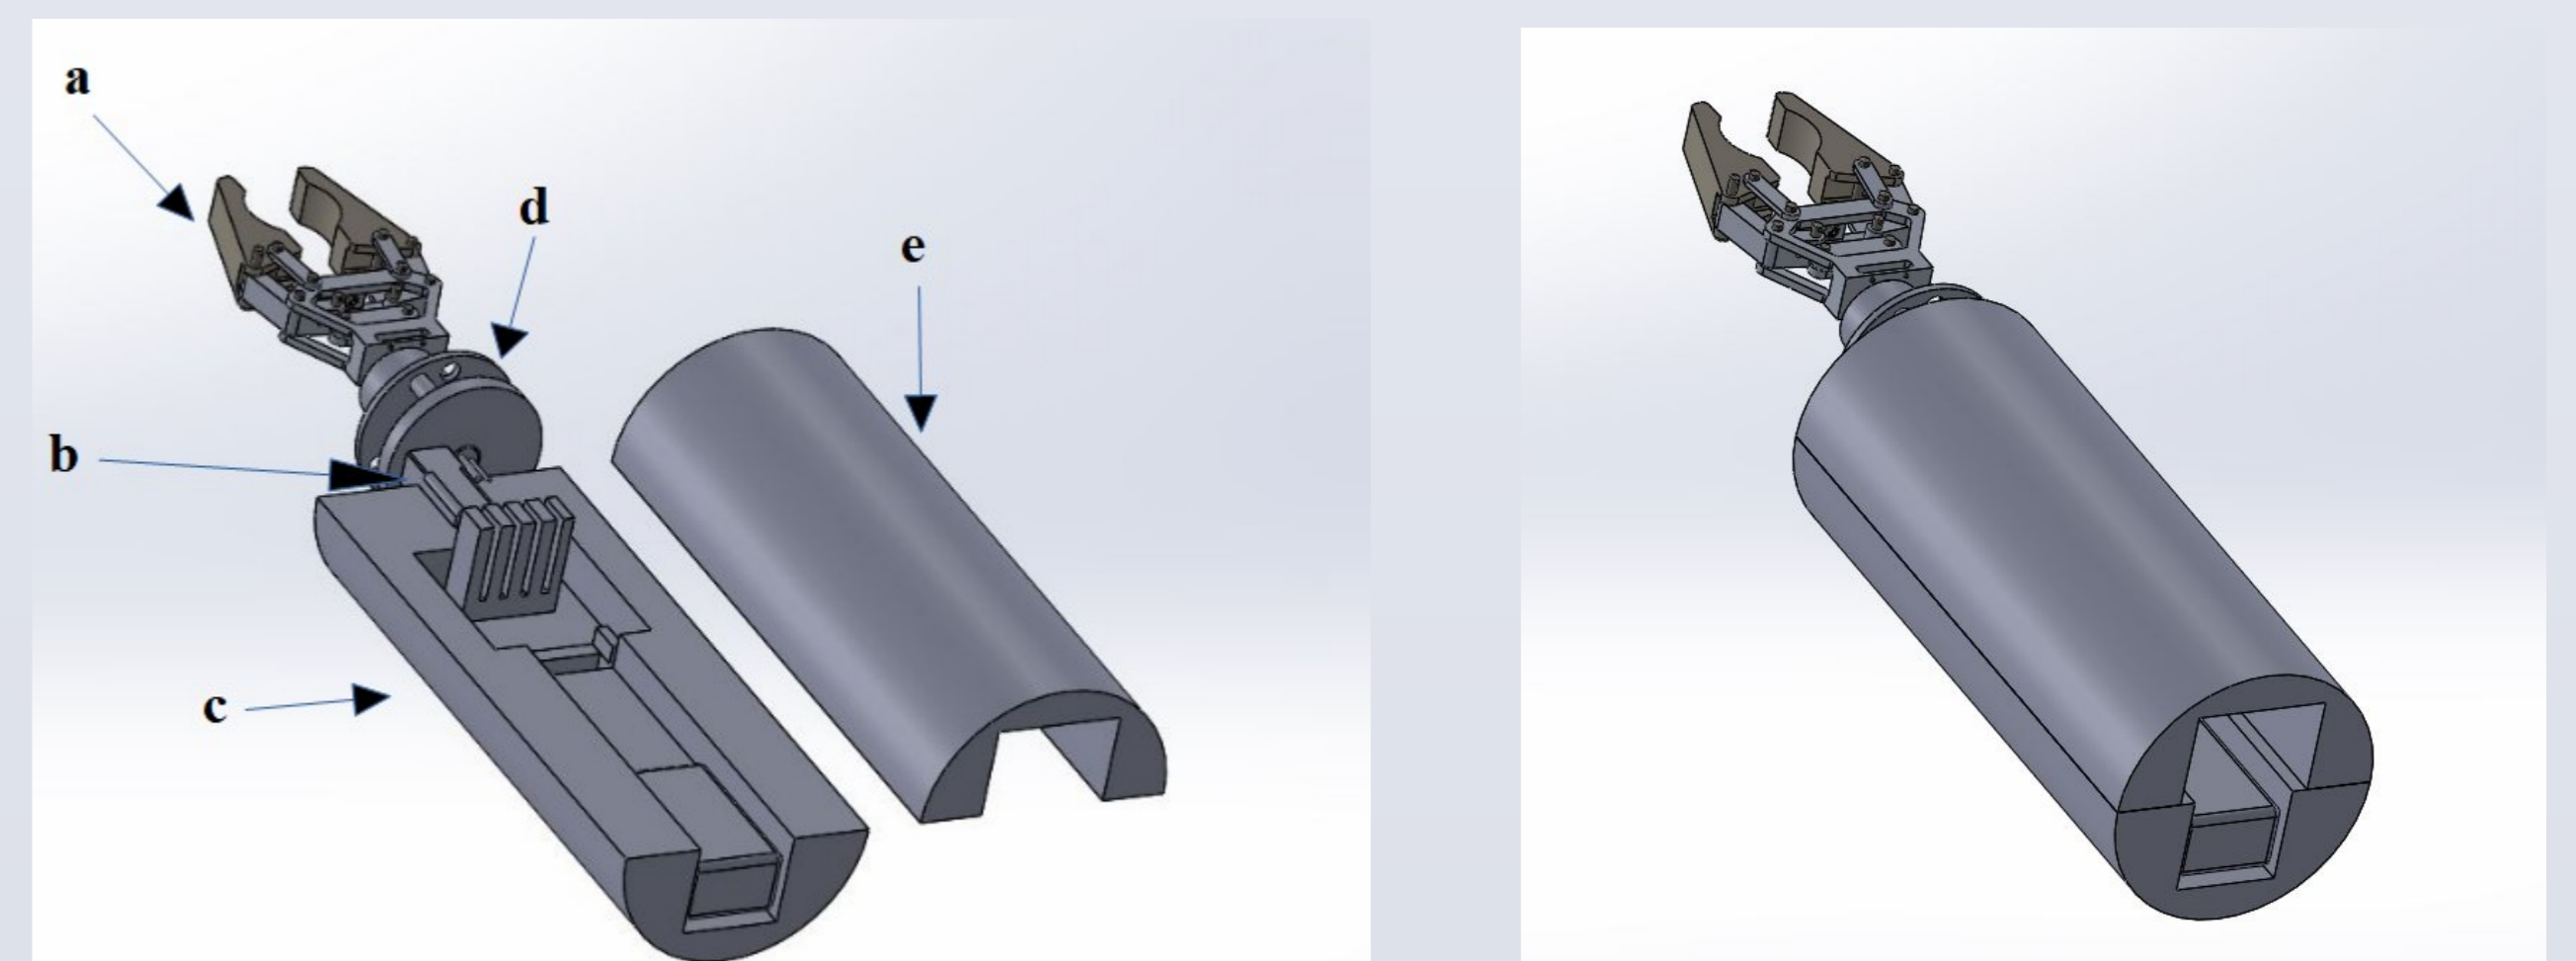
,5: Solidworks(2016) drawings; gripper(a), reducer motor(b), lower casing(c), slipring(d), upper casing(e)
